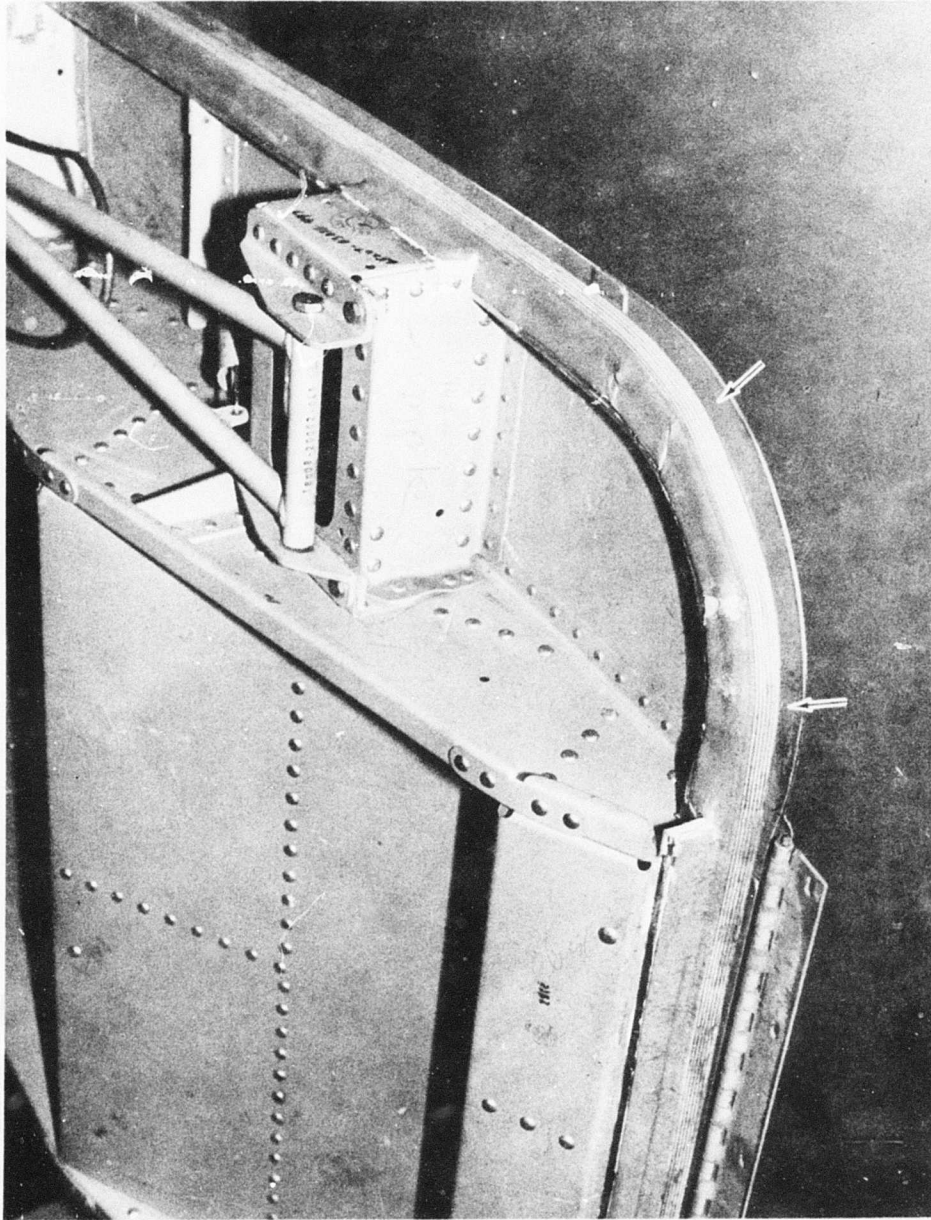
Lower Personnel Door, Redesign, Improved Seal.
